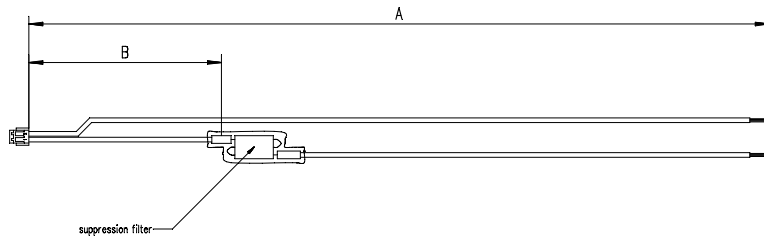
Power Supply Cable with Filtercoil ETV2
